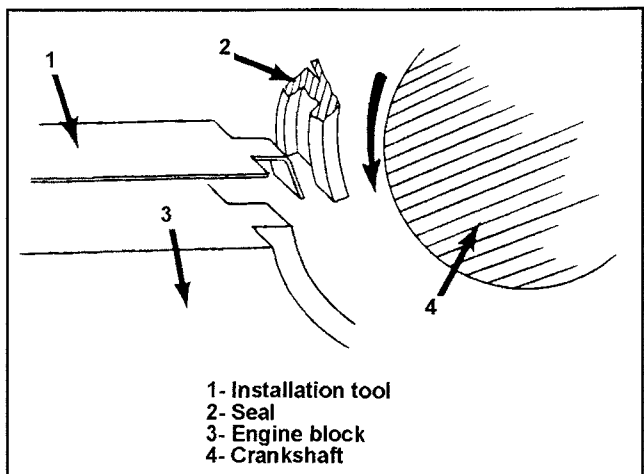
and then use the tool to feed the seal around the crankshaft
